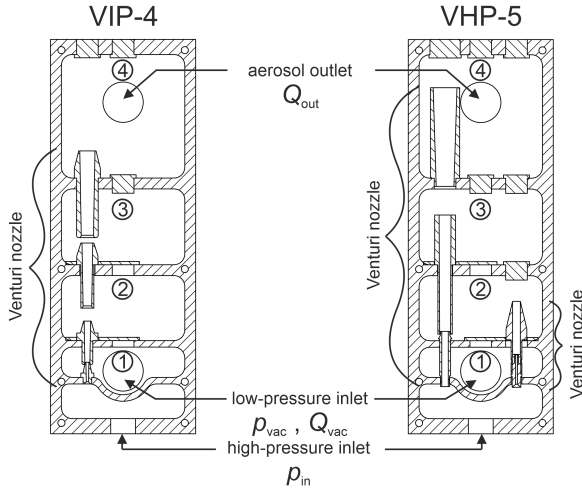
Schematic drawing of the commercial vacuum ejectors VIP-4 and VHP-5.
